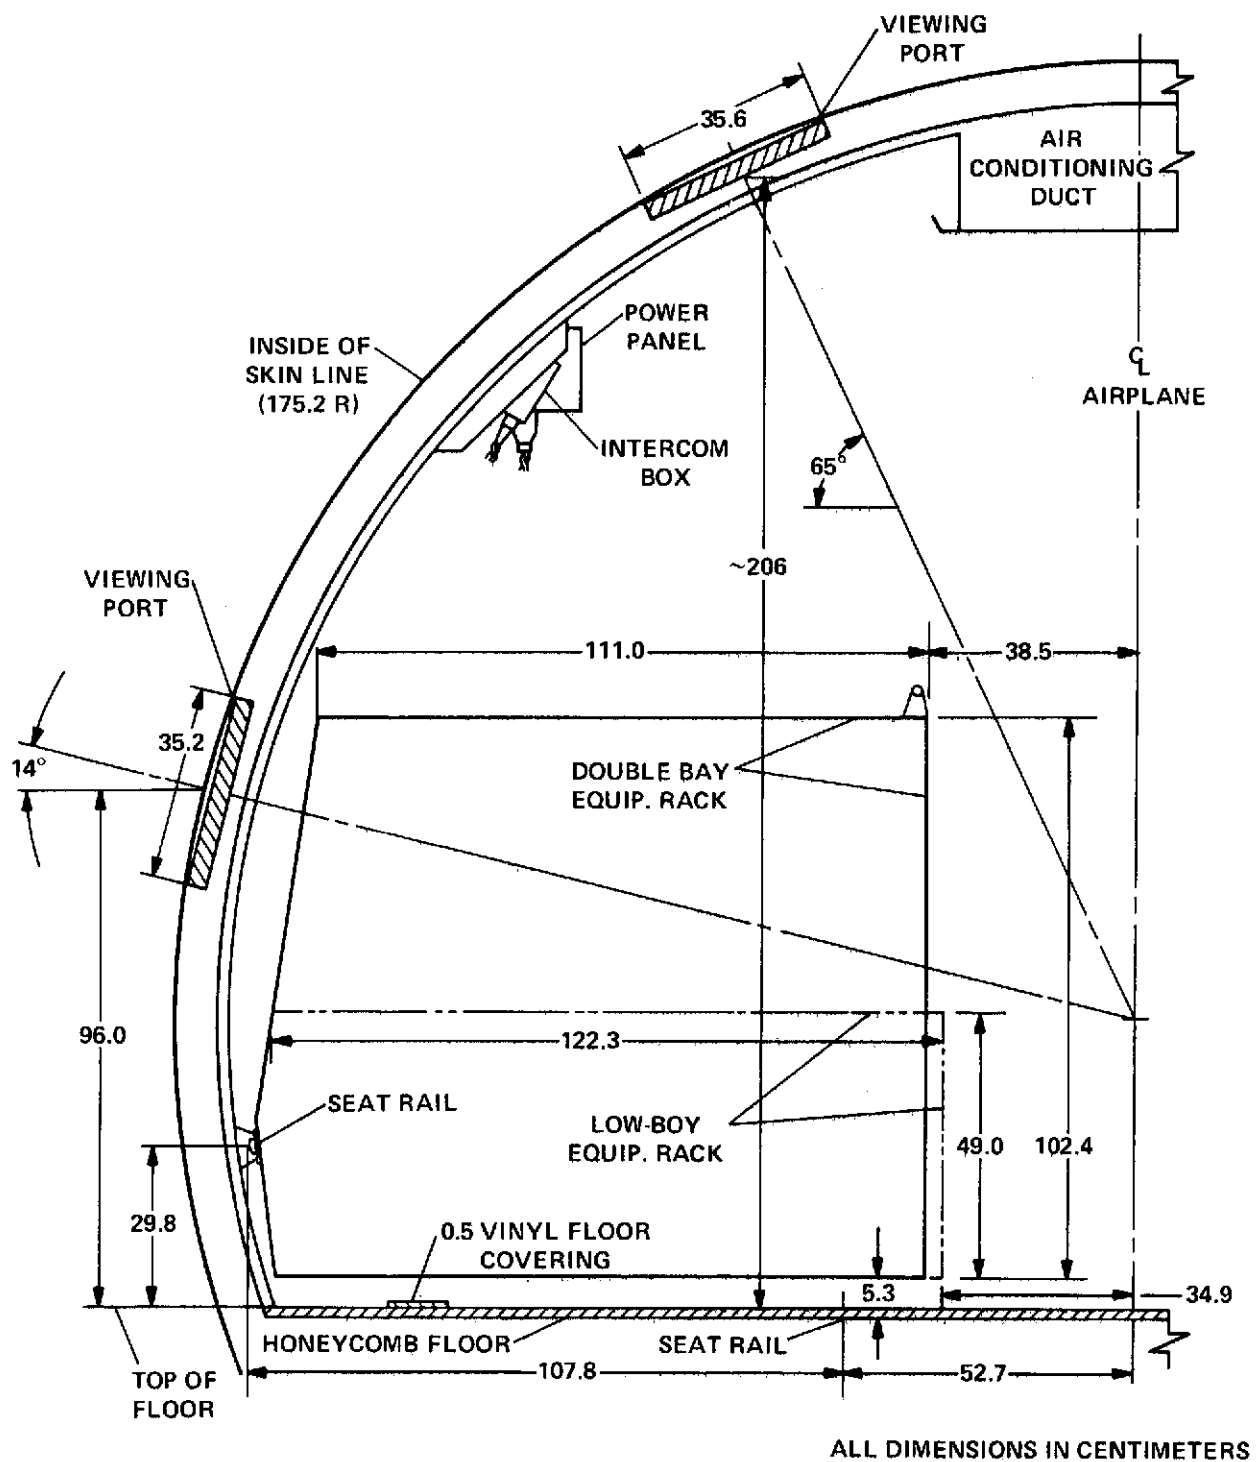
C. RELATIVE LOCATIONS OF EQUIPMENT RACKS AND VIEW PORTS, CV-990
